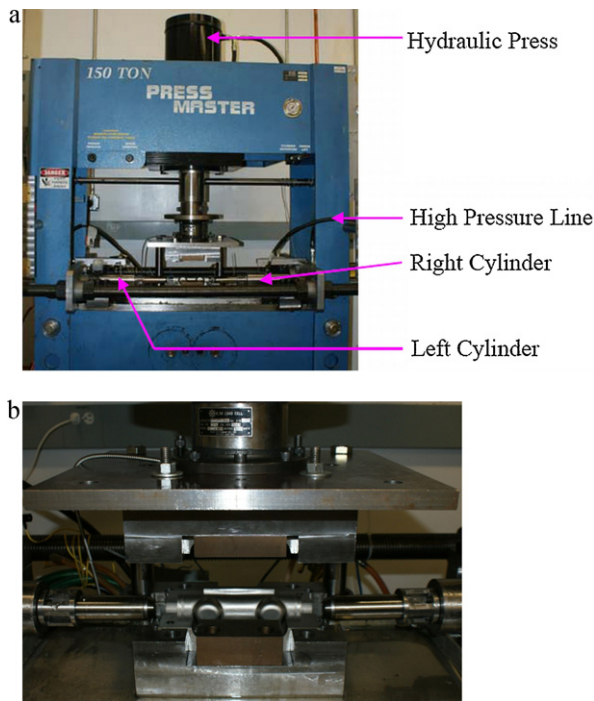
(a) Hydroforming test rig and (b) tube hydroforming tooling.
